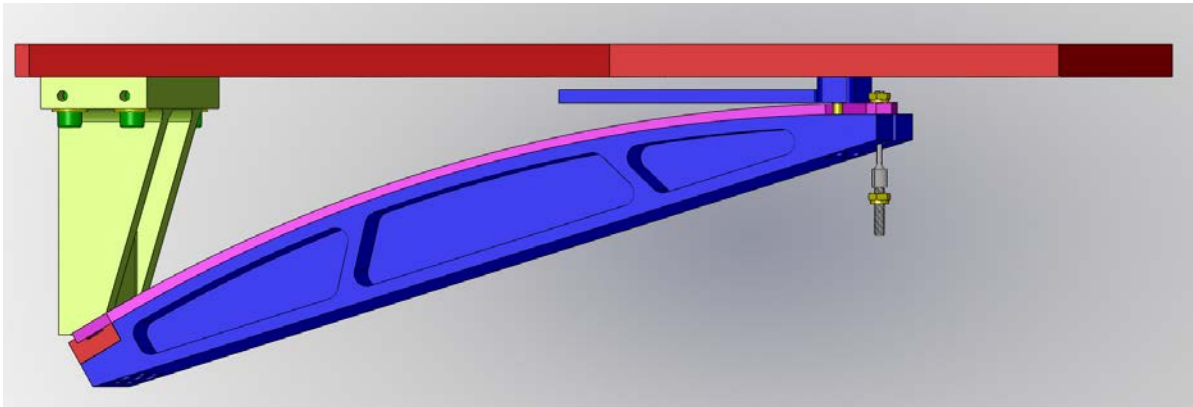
D1200140: ITM Elliptical Baffle Blade Assembly in Post-bending Configuration
